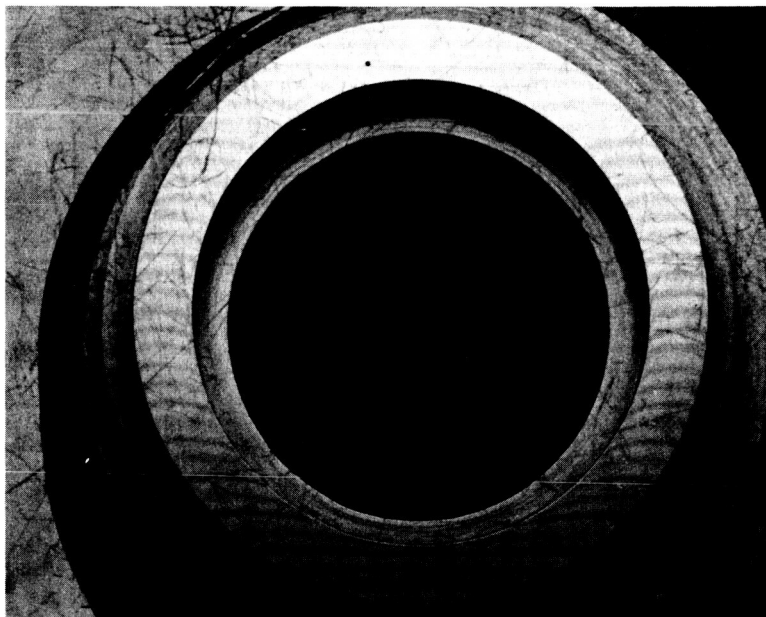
Lapmaster Interference Photo of Test Sample 3 After Electron Beam Weld.
